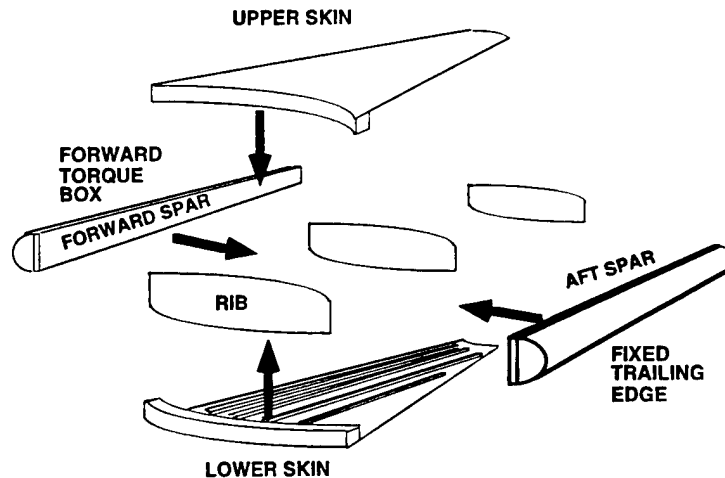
Exploded view of sub-assemblies making up the right horizontal stabilizer.
